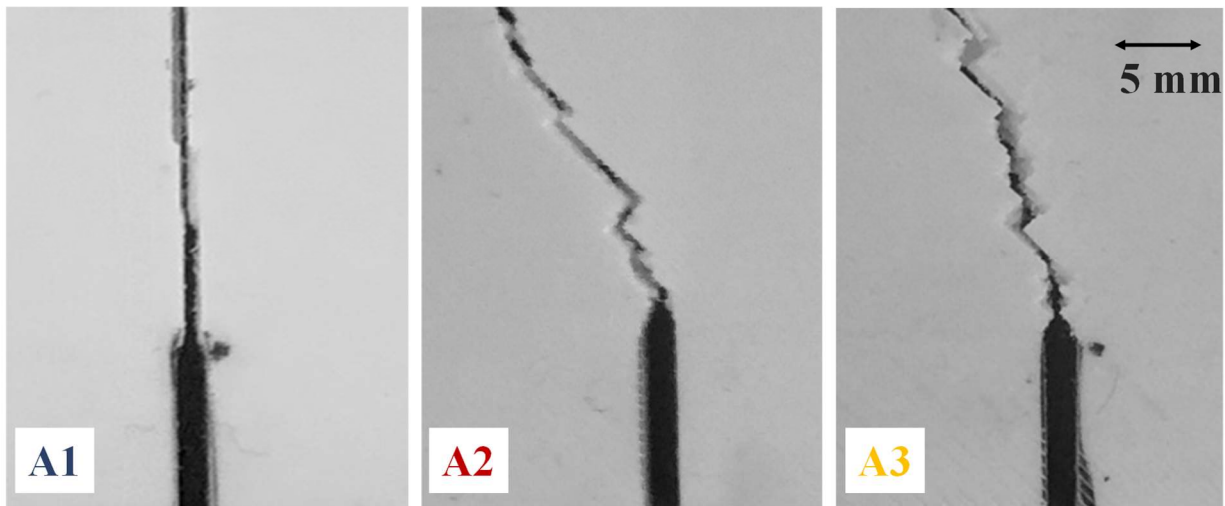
Photographs of observed crack paths in fractured 3-point bend specimens. (The specimen A3 is flipped by 180° for consistency with A2).
